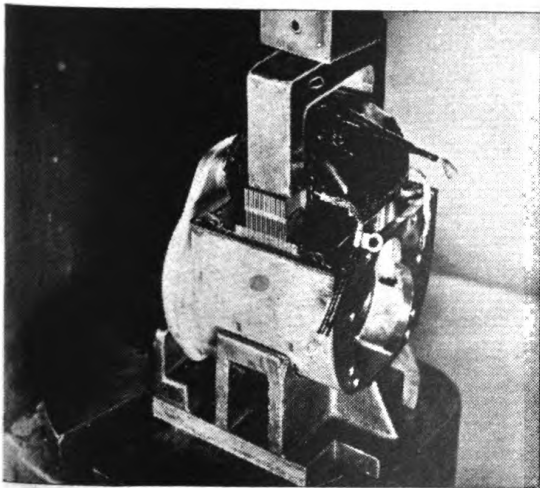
Pressing Coil Into Place Using Yoke in Ram of Arbor Press
